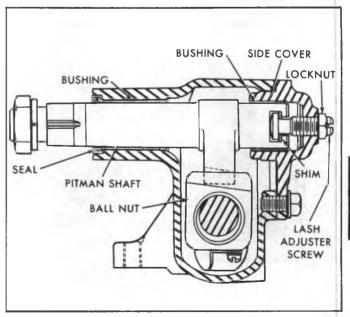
Steering Gear (Except Corvette and G10-30 Series Trucks)
